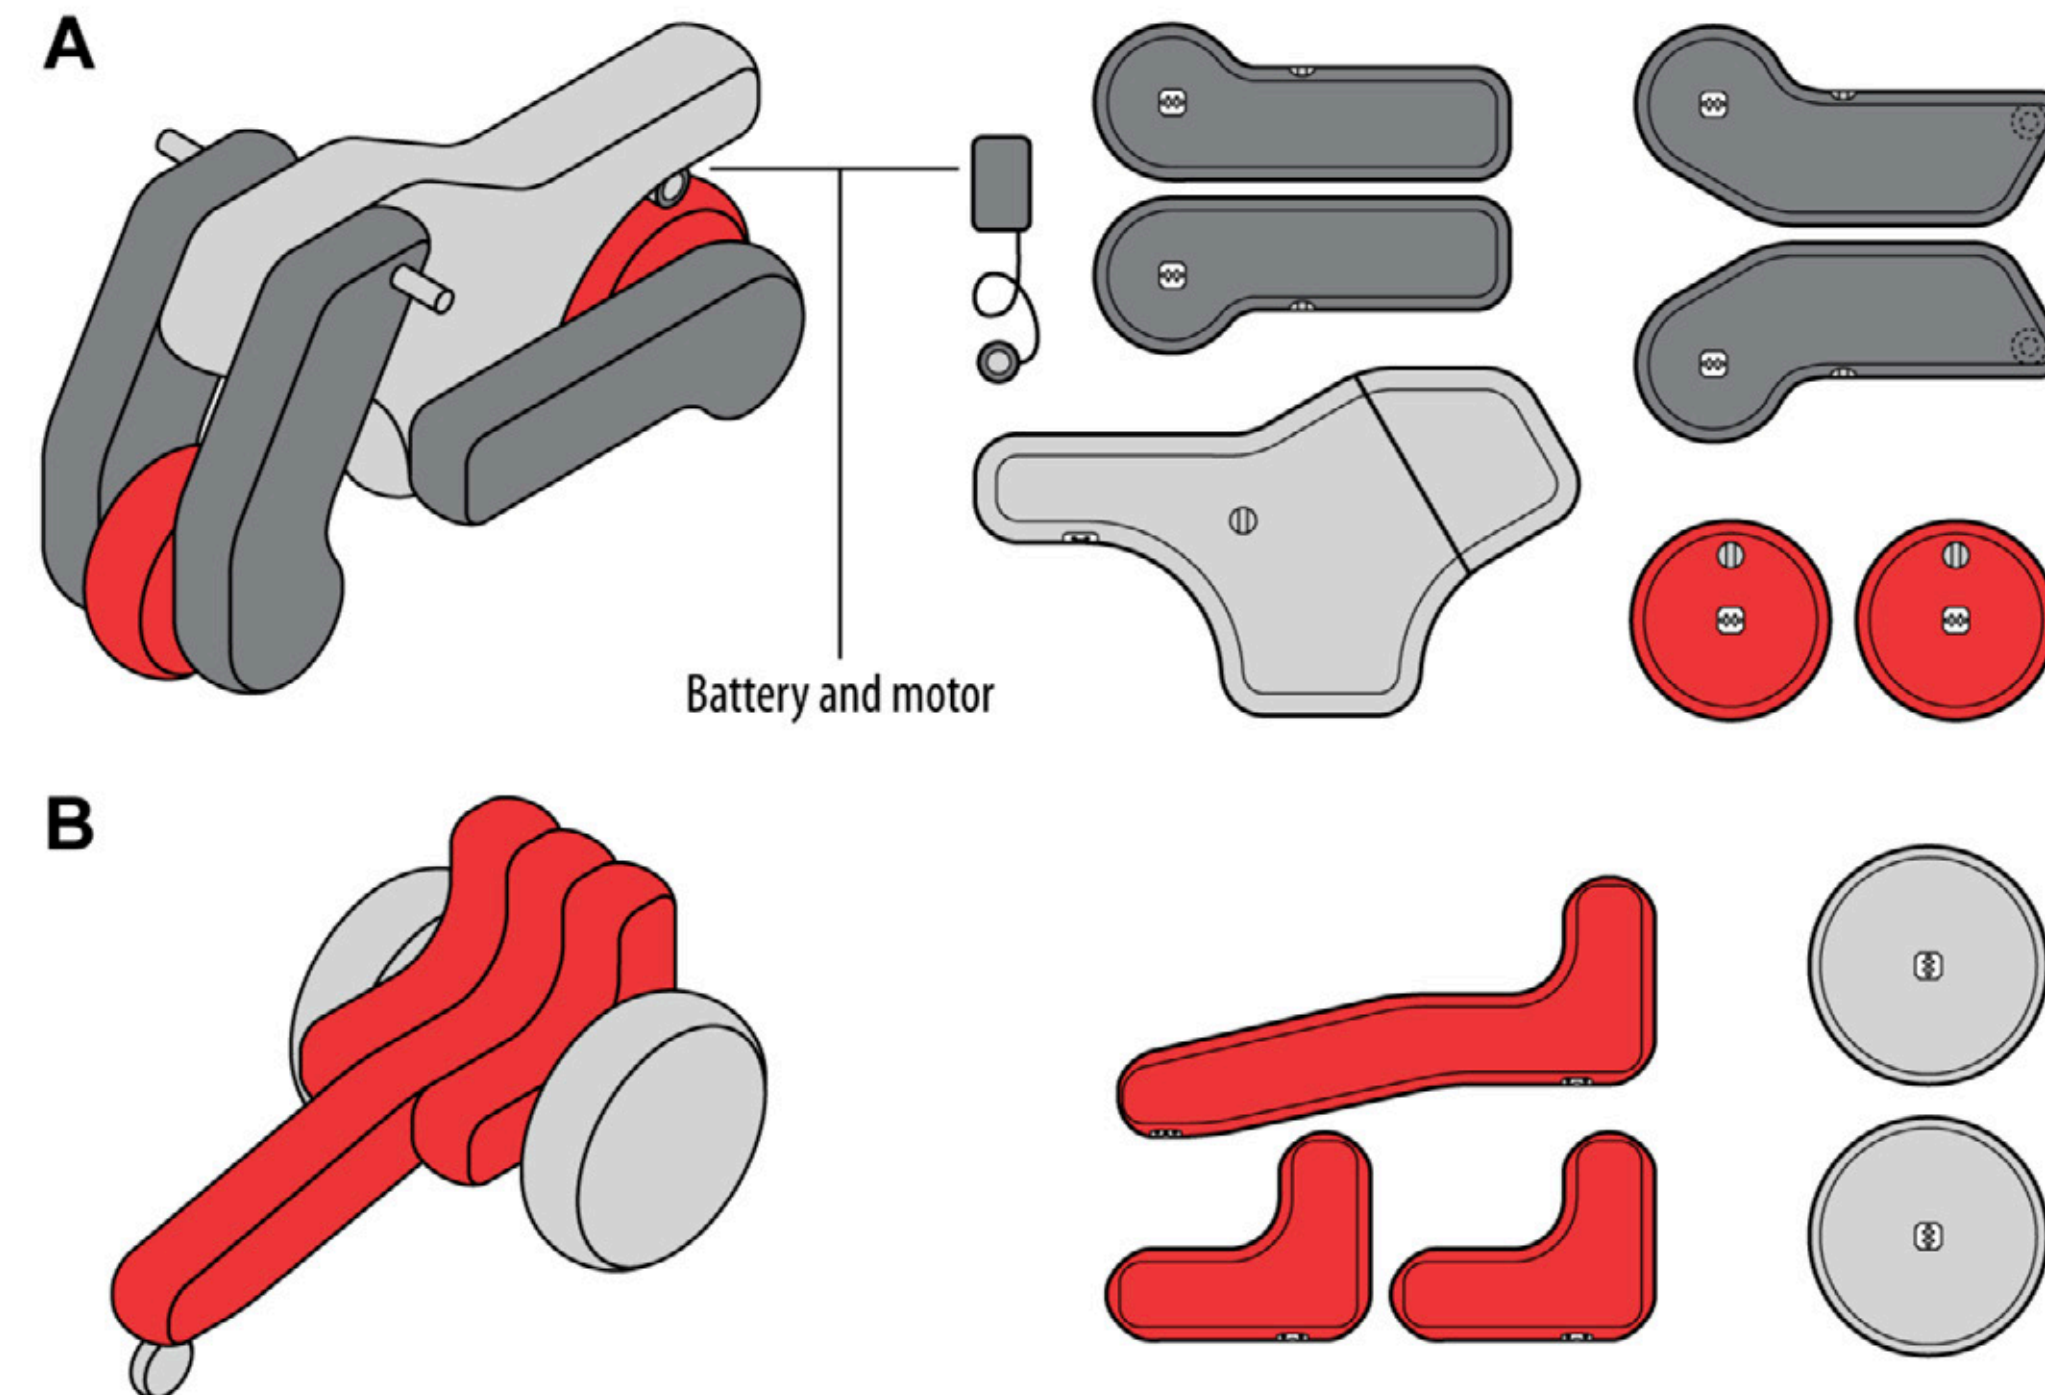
A: Design examples of a motorcycle. B: Design example of a wheelchair. The isometric drawing displays the assembly of inflatable parts.
